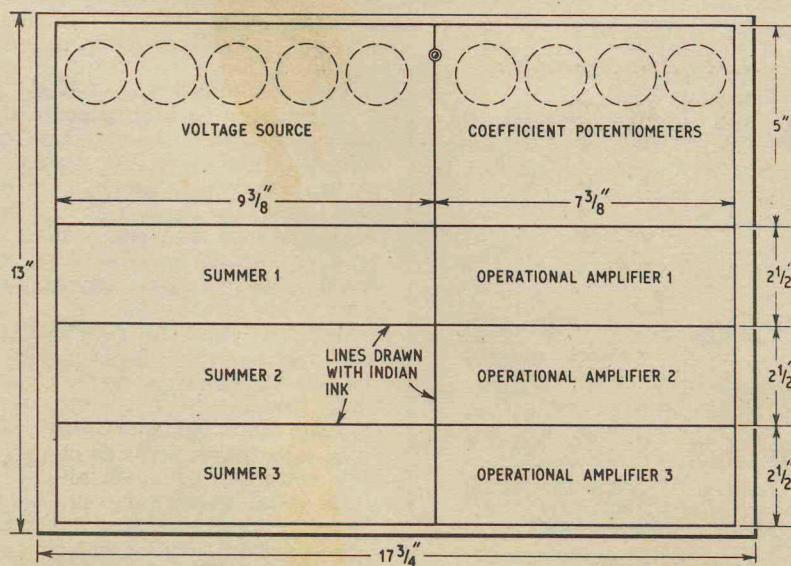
UNIT "A" front panel. Overall dimensions and sectional dividing lines
